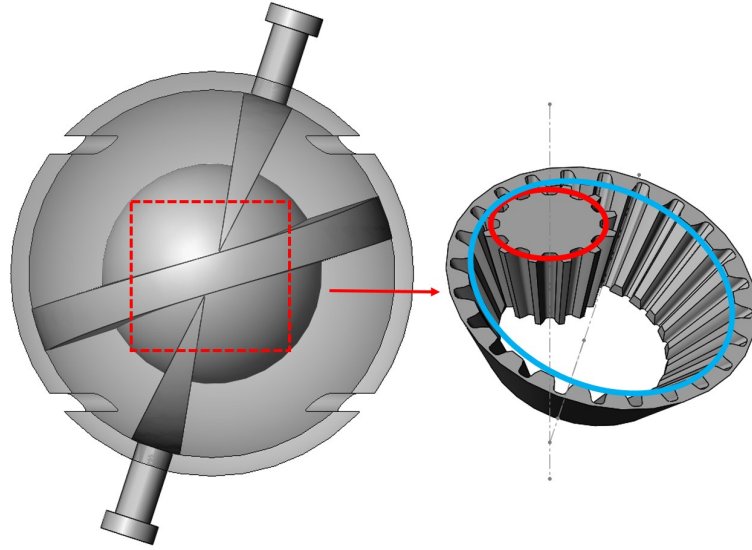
(a) A 4-chamber version of the spherical gerotor TAH; (b) the inner bevel gear set.
